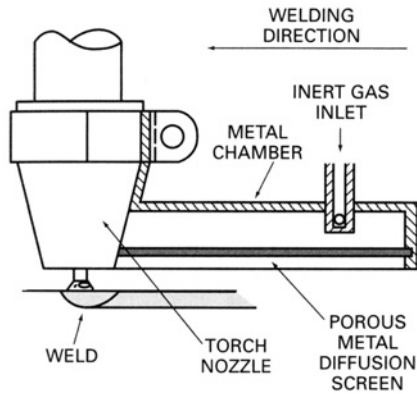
Torch trailing shield for TIG welding of titanium and other reactive metals.
